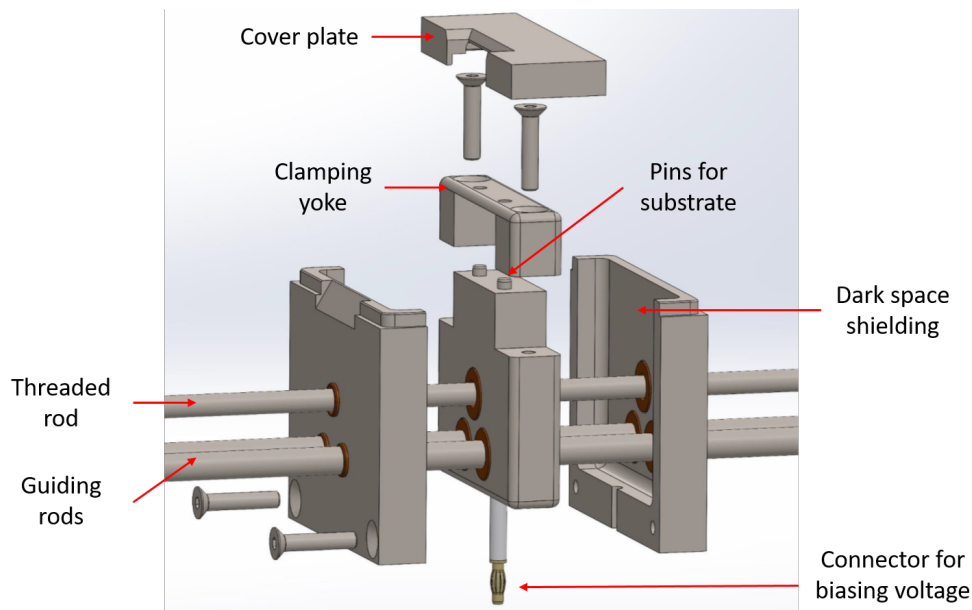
Exploded view drawing of a clamping block used in the second-generation substrate holder. Based on [25].
